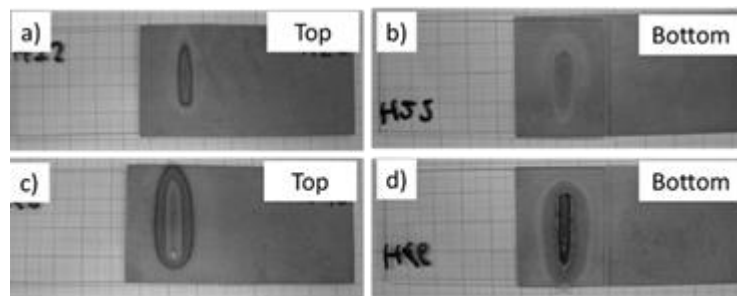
Top and bottom side of the joints: a) and b): 900 W, 450 mm/min
